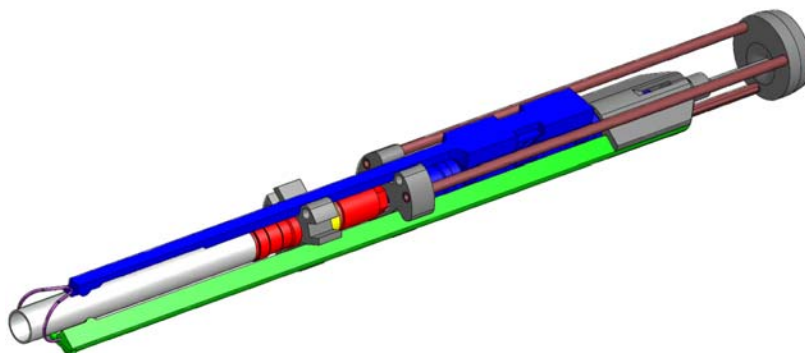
Preliminary drawing of the lower part of the MELODIE sample holder : on the left, the Zry tubular sample with the 3 feelers and the self-calibrating zone (in red). On the right, the electromagnetic Diameter Gauge (IFE Halden and CEA design).
